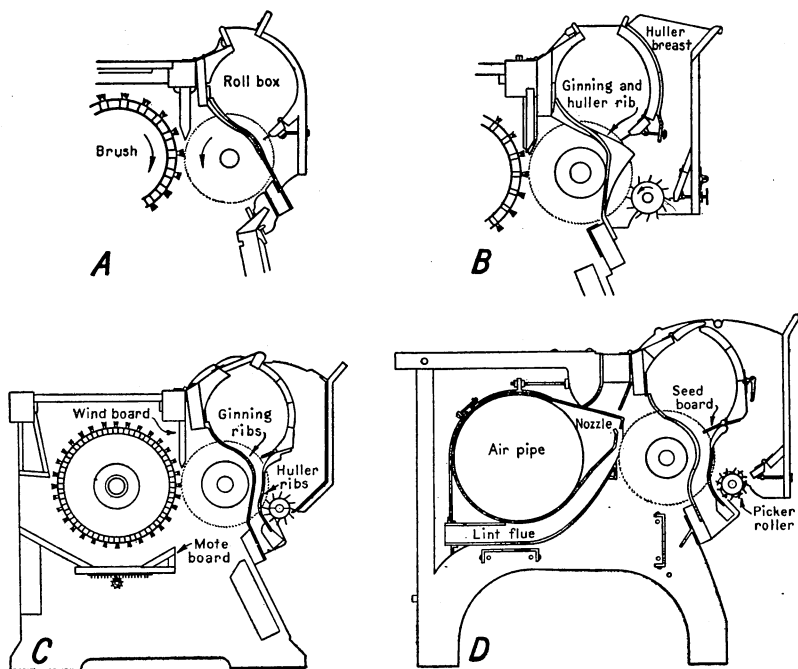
Kinds of gin fronts: A, Plain brush gin; B, single-rib huller brush gin; C, double-rib huller brush gin; D, double-rib huller air-blast gin.
